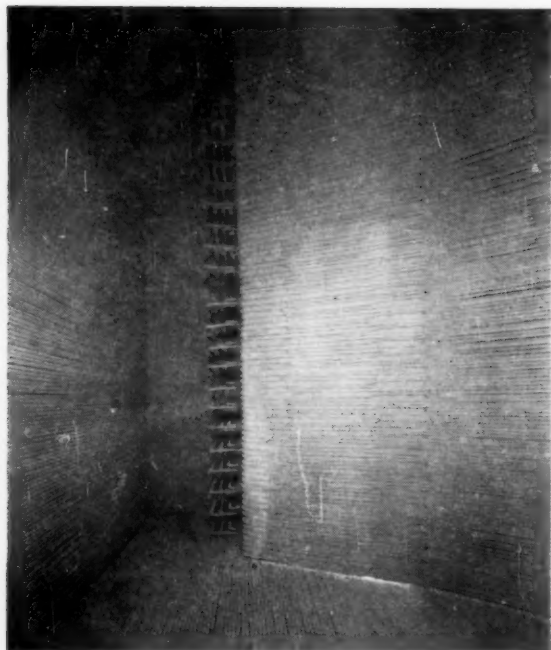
VIEW TAKEN FROM INSIDE COMPLETED FURNACE OF THE 15,000-KW MERCURY BOILER, SOUTH MEADOW
